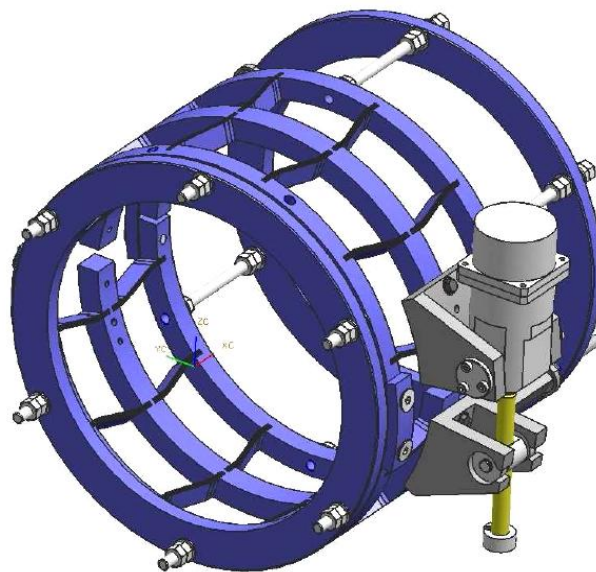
the new design of the Blade Tuner with the revised driving system
